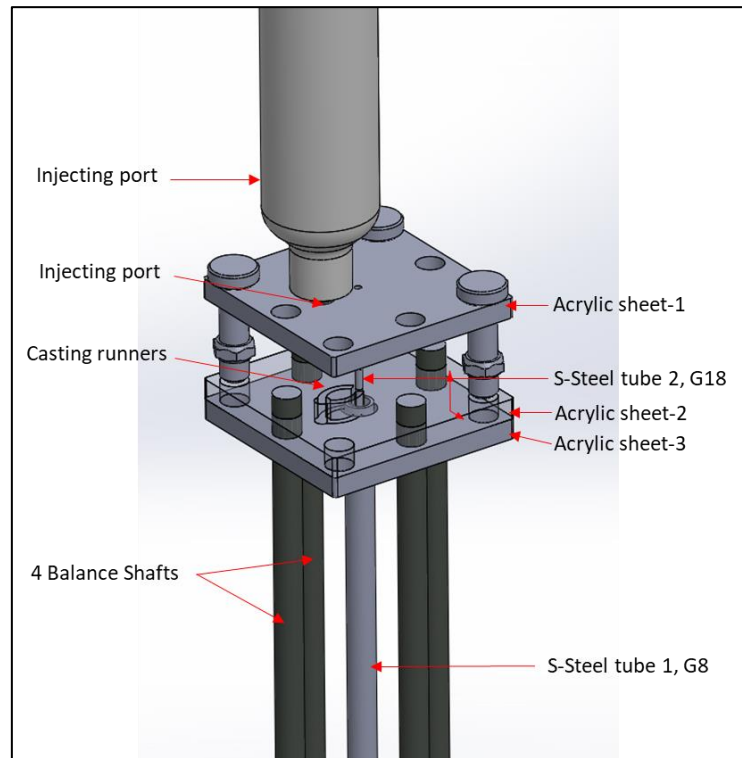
The assembled mould that designed to produce a single soft filament.
